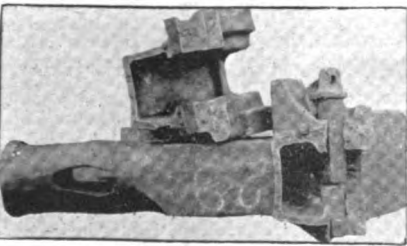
STANDARD COUPLER—Mal. Iron Bar, Steel Coupler; 3 blows at 10 feet.
